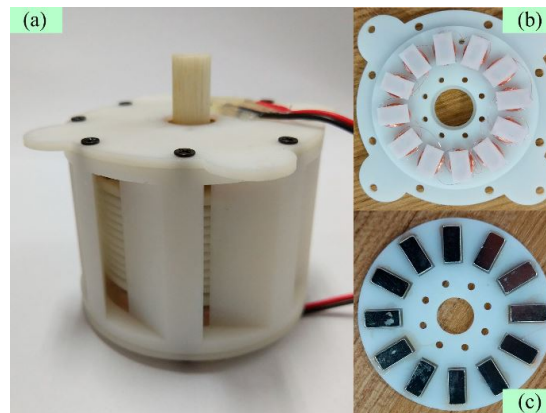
Photographs of flow energy harvester prototypes: (a) Assembled prototype, (b) Coils fixed in the end cap, and (c) Permanent magnets mounted on the disk. [14].
